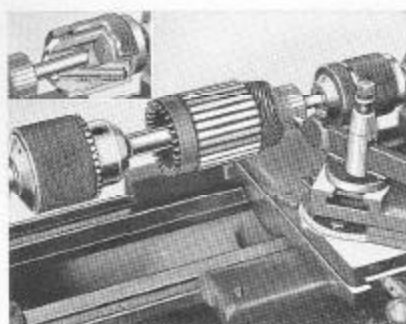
Centerless Armature Mounted in Lathe using Tailstock Adjustable Bushing.
